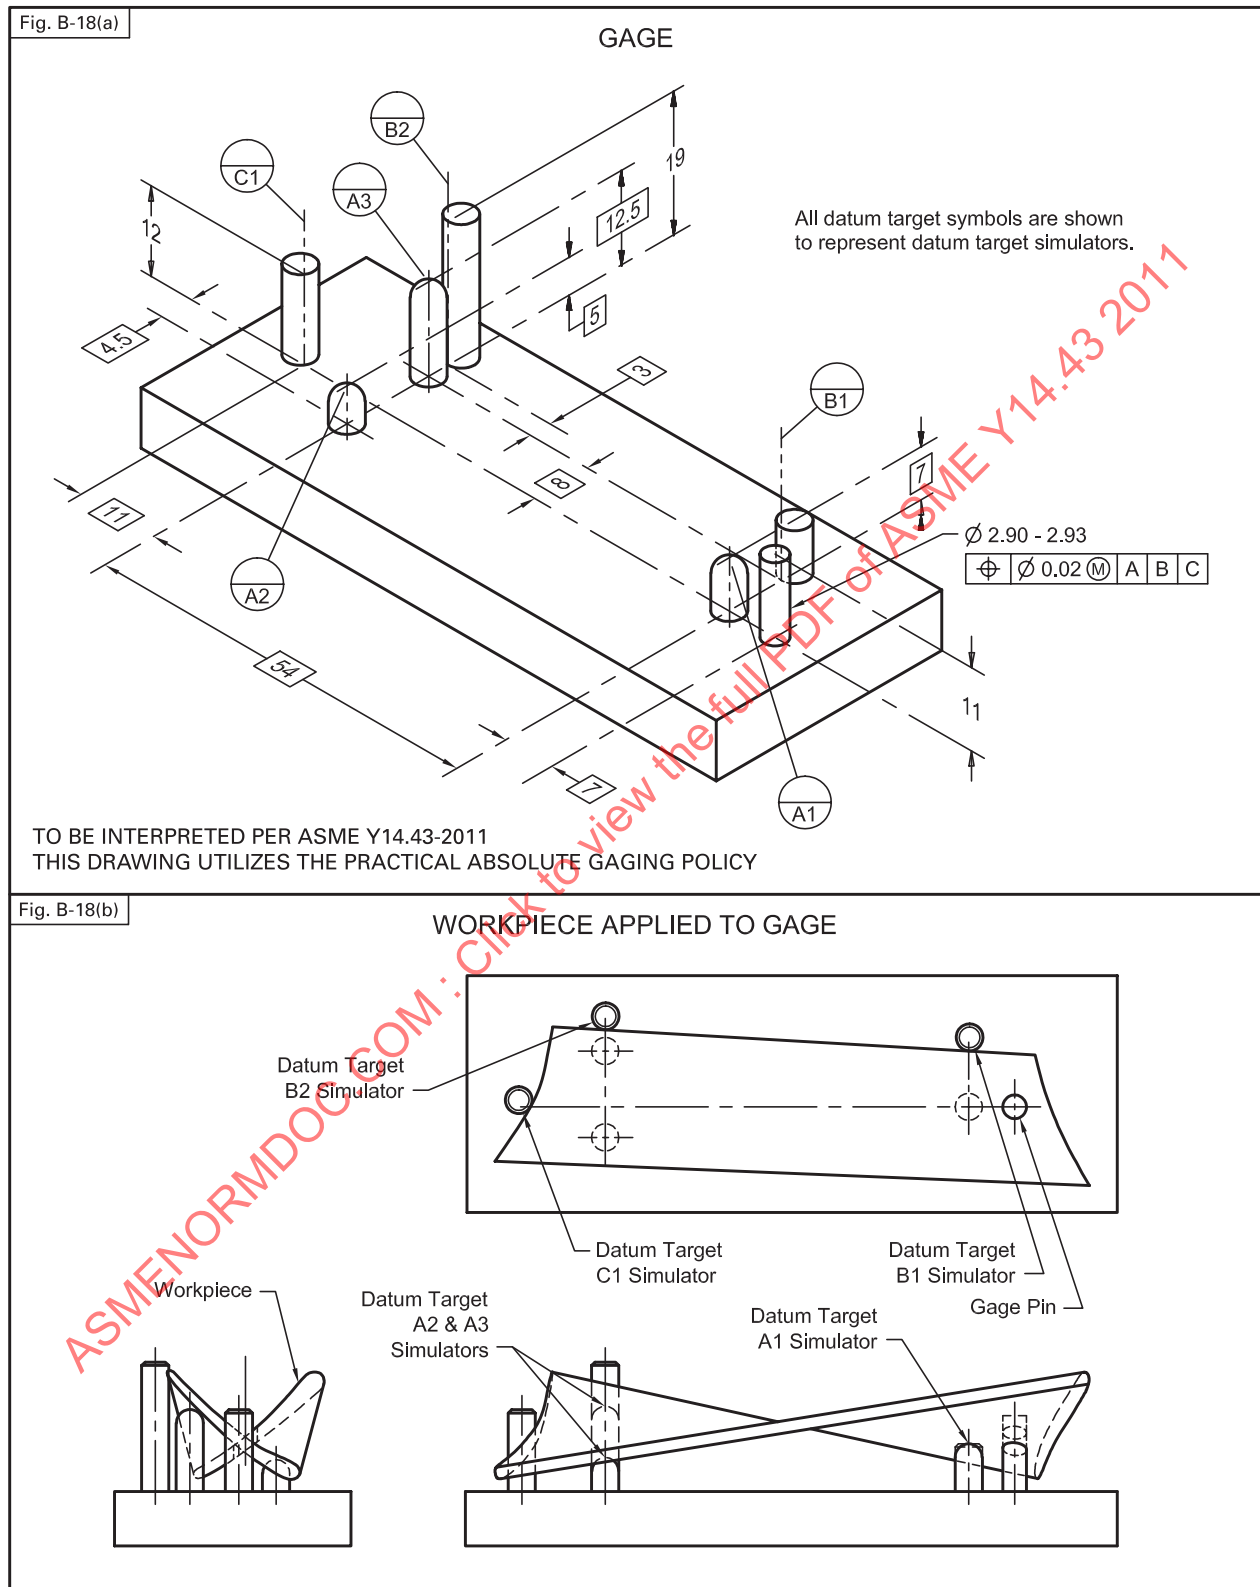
Datum Targets on a Complex Part (Cont'd)
